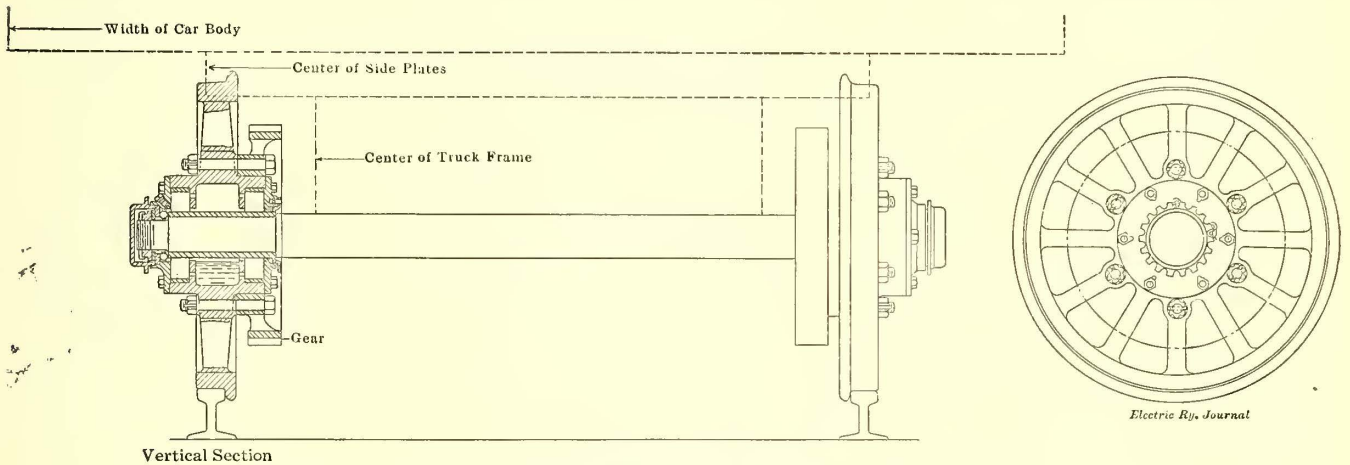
Section, Side View and End View of Roller-Bearing Car Wheel
